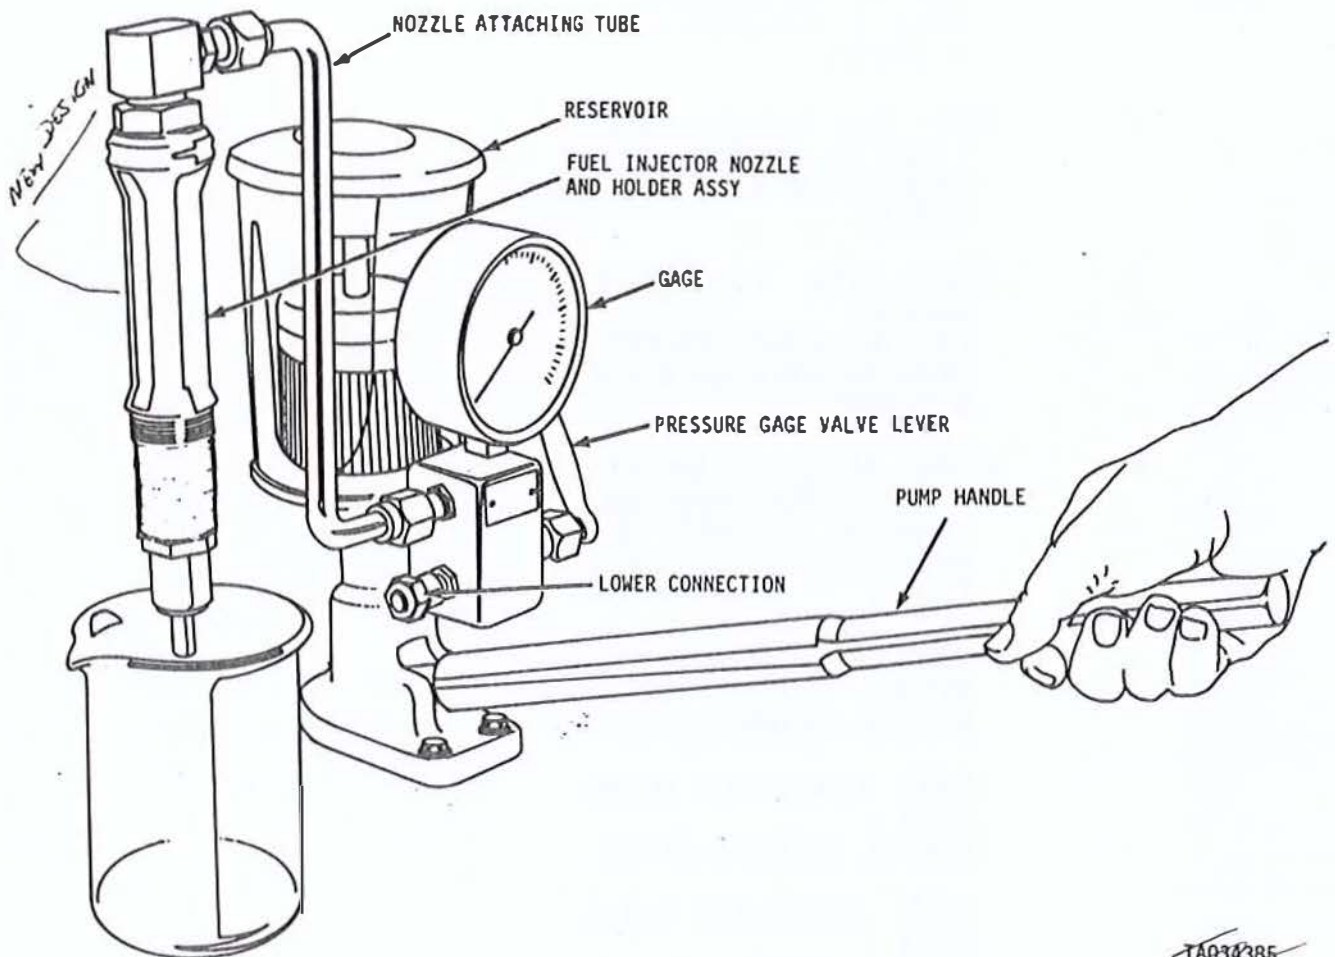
Testing fuel injector nozzle and holder assembly.
